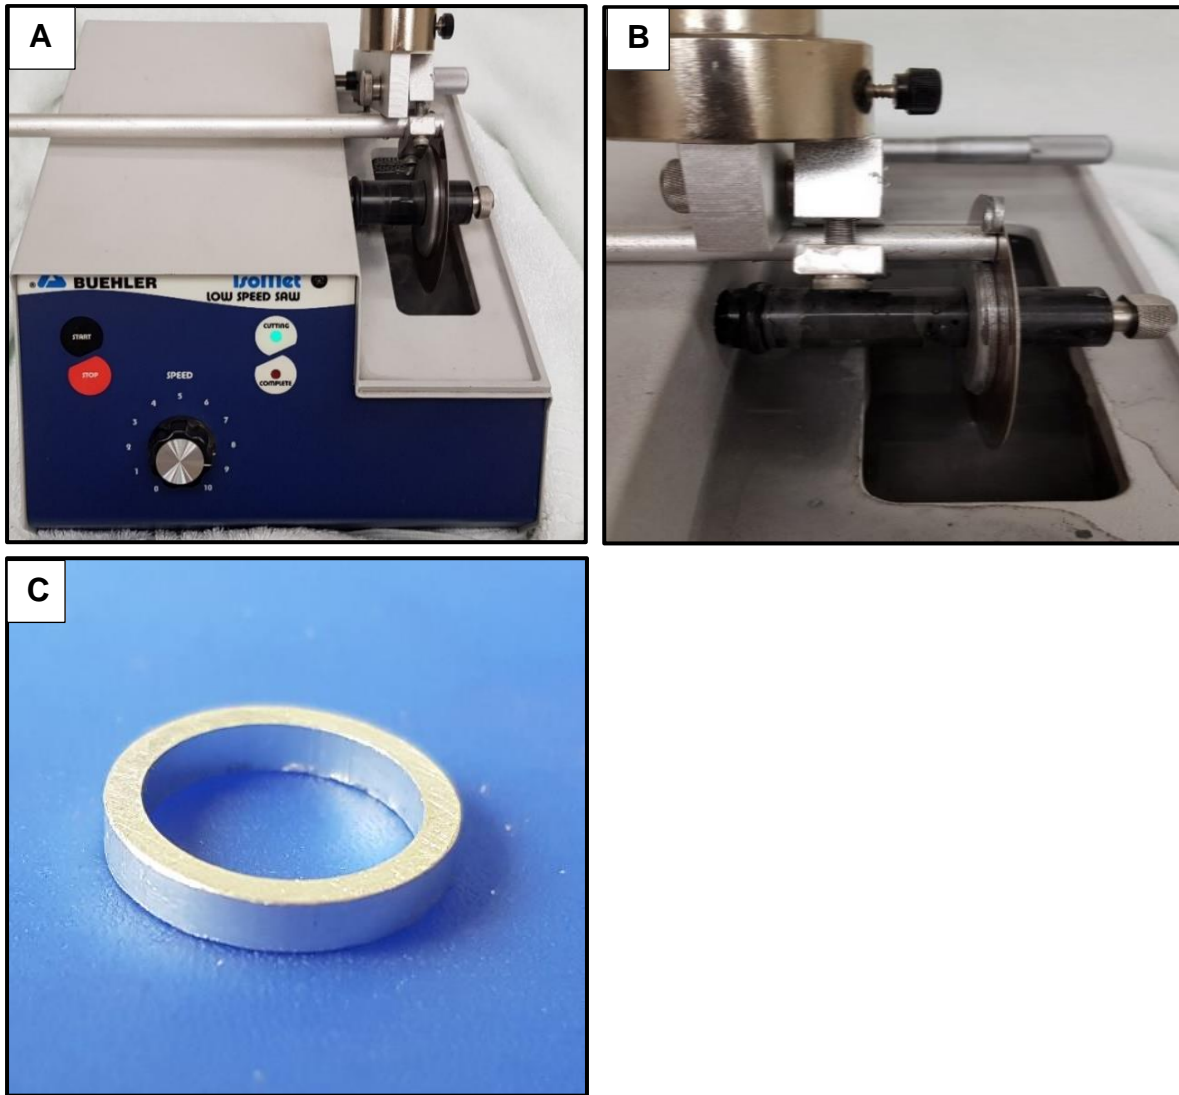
A) ISOMET low speed saw used to cut aluminium pipe for cylindrical moulds, B) Cylindrical mould being cut by low speed saw, C) Aluminium cylindrical mould (10mm diameter x 2mm height).
